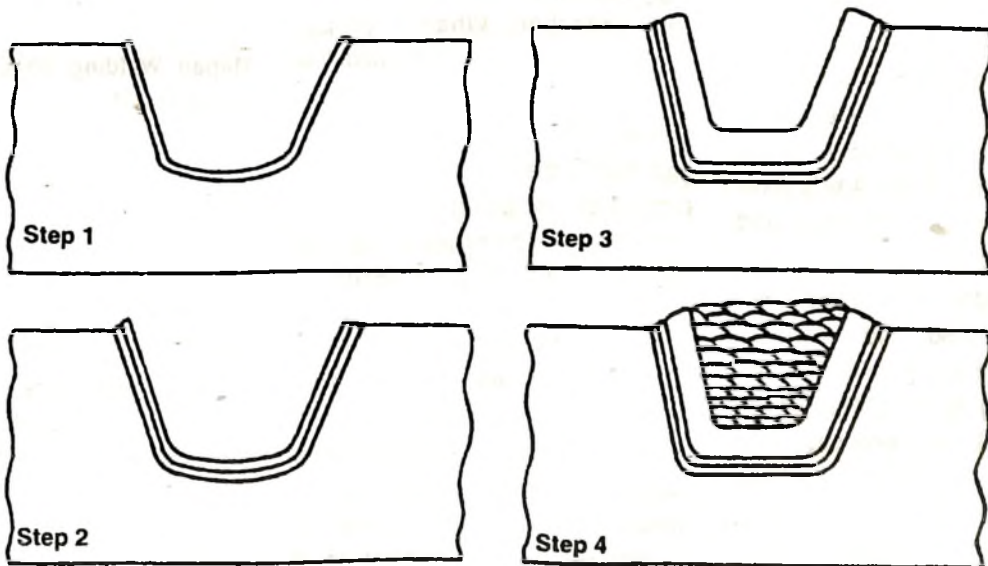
Automatic or Machine (GTAW) temper bead weld repair [6]. (Step 1: Deposit layer one with first layer weld parameters used in qualifications. Step 2: Deposit layer two with second layer weld parameters used in qualifications. Step 3: Deposit next four layers with layer three through six weld parameters used in qualifications. Step 4: Subsequent layers to be deposited as qualified.)
